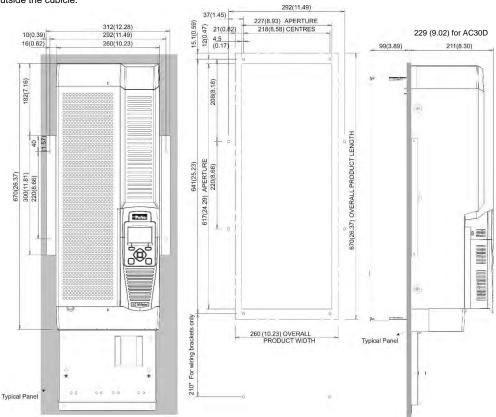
Mechanical Dimensions for Through Panel Frame H
